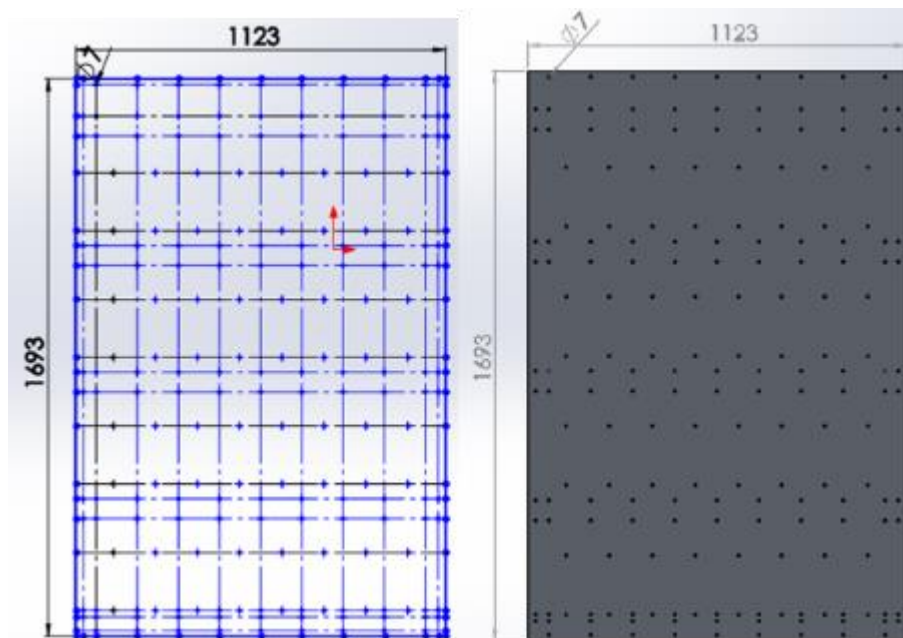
2 Detail design of aluminium back plate in SolidWorks
